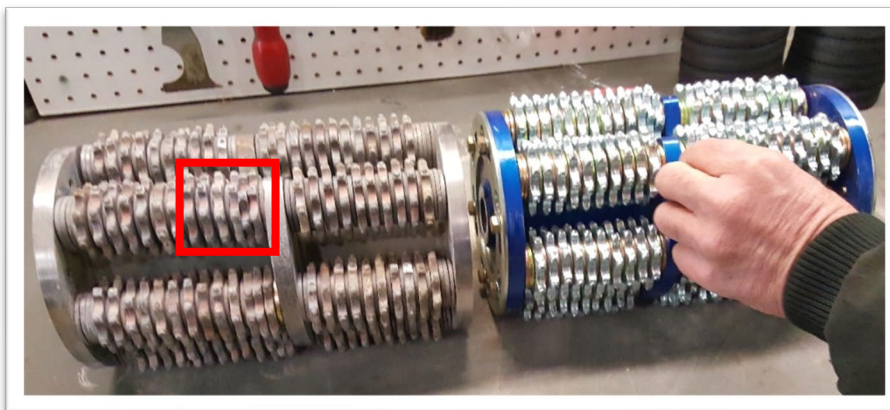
Comparison of head with damaged teeth (red) and brand-new head (r). Uneven wear can break shafts and damage roads. There should be no horizontal play on shaft, no flat spots on cutters and washers should be snug.
